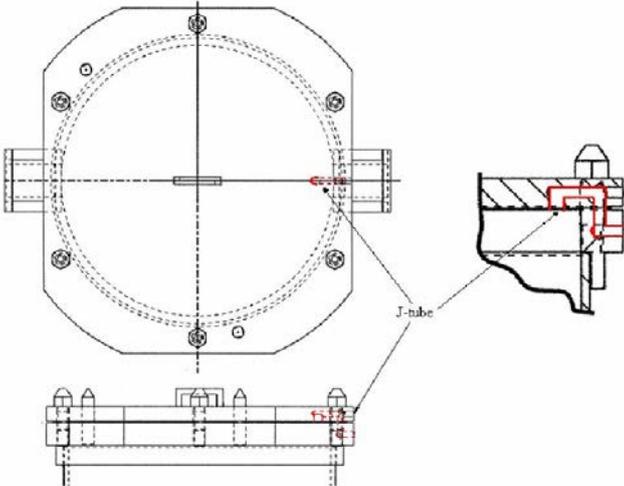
Later inverted J-tube design on damaged fuel storage can.
